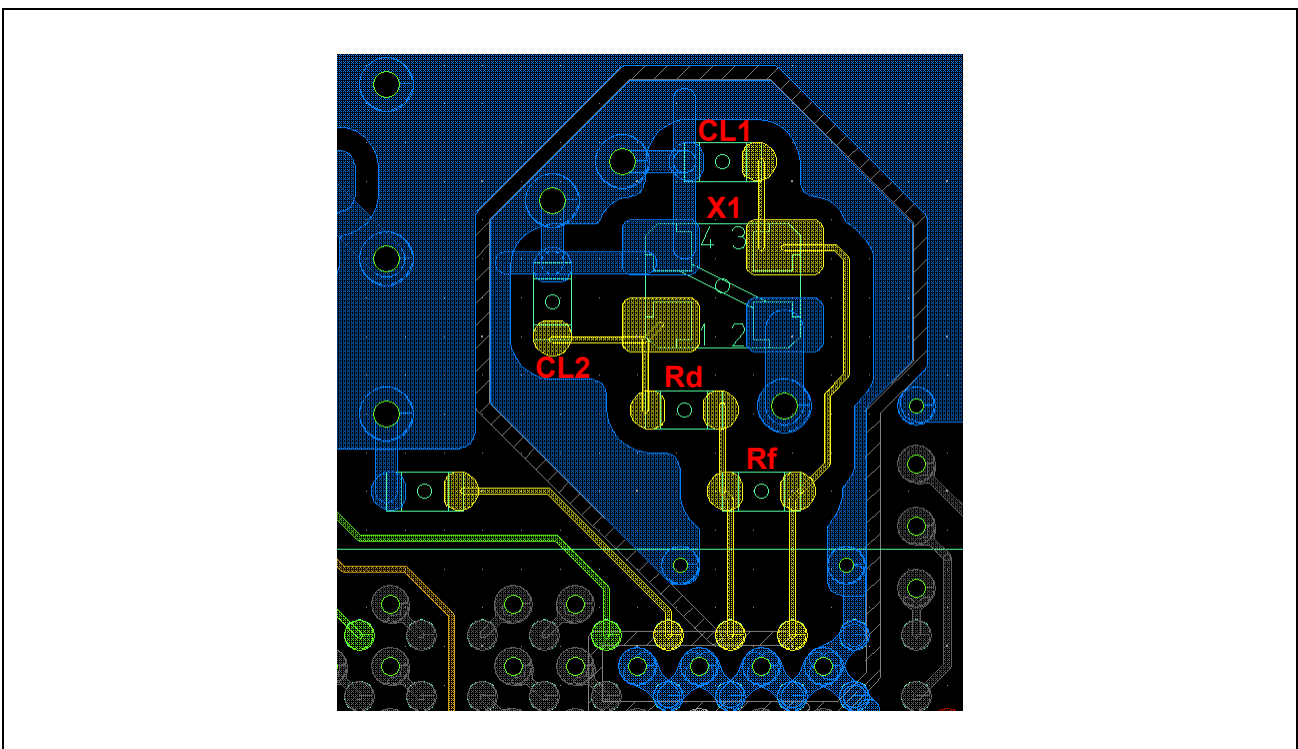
Example Layout of the First Layer (Layer 1) of the PCB
